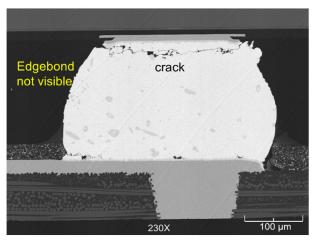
Solder joint cracking on the PCB side for EB1
